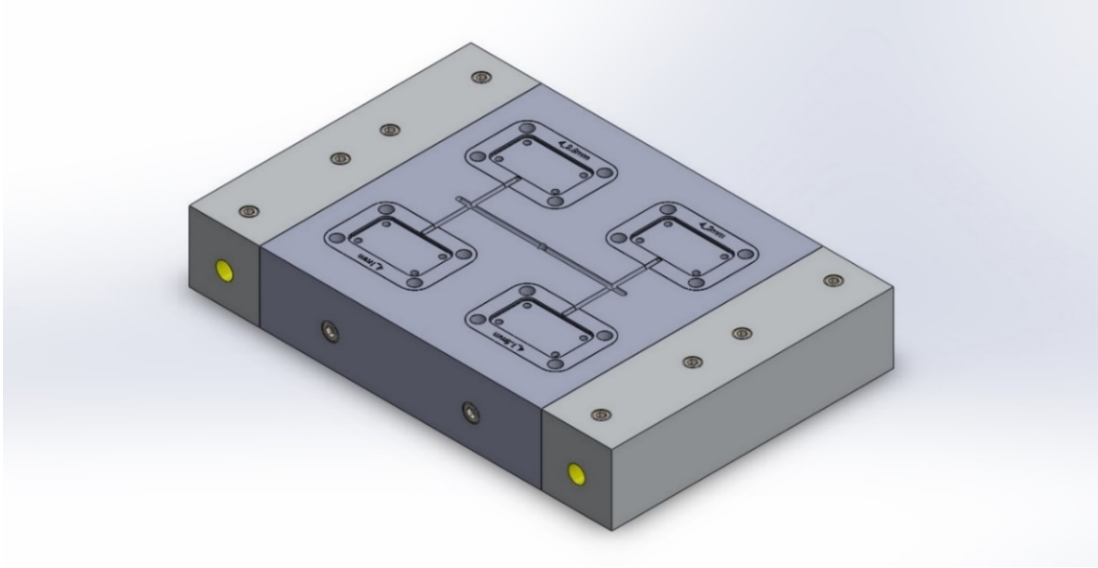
Assembled IM tooling bolster with inserts for a 4 mm diameter hydraulic cooling channel.
